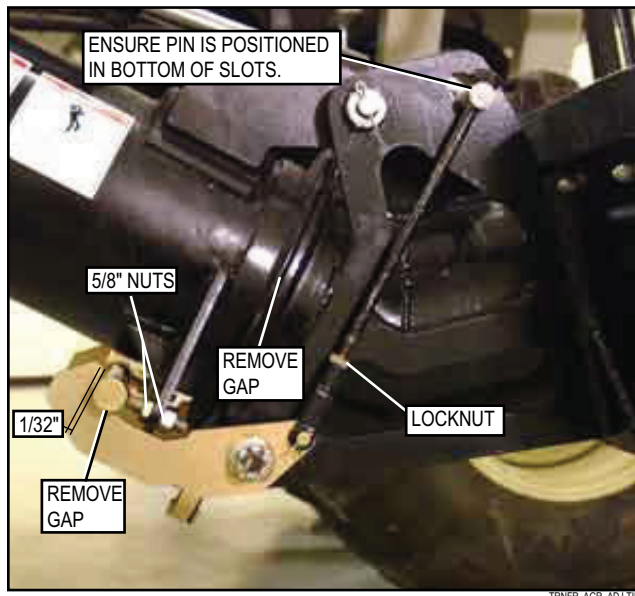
10" Deluxe Auger Transfer Hopper Lock Adjustment
